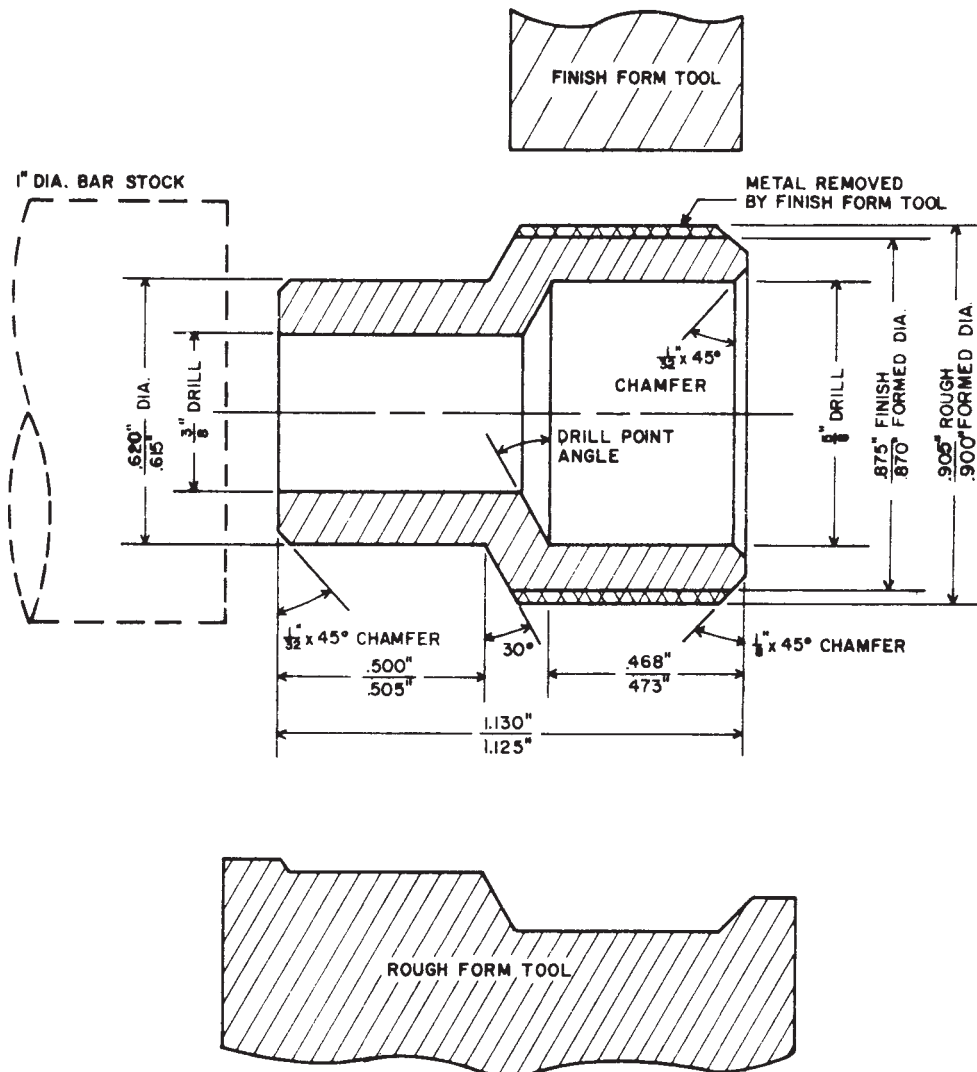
Details of the ASTM Machinability Test Specimen and the Relative Positions of Form Tools
